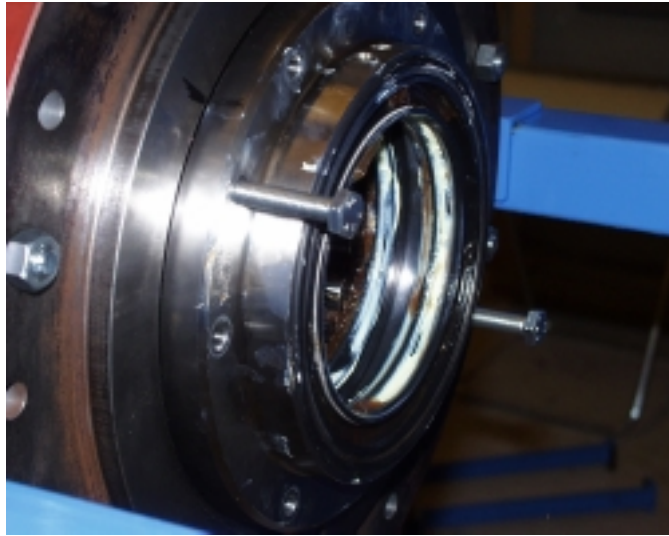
• Press out the bearing cover by using two M10x65 bolts.
